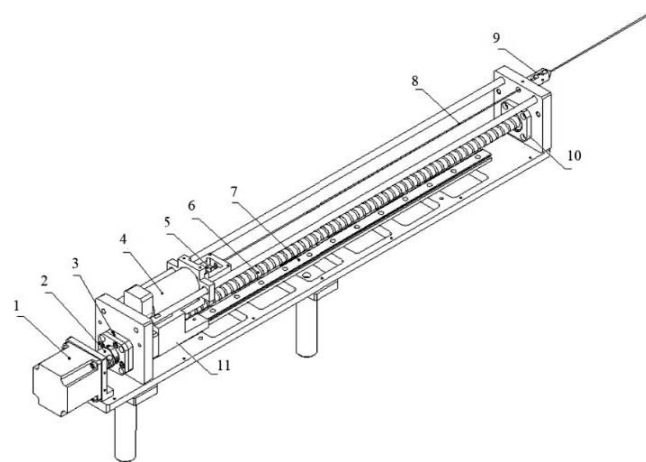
Mechanical structure of the wood resistance drill.—Note: 1. Step motor; 2. Coupling; 3. Back screw support; 4. DC motor; 5. Drill needle clip; 6. Screw rod; 7. Linear guide rail; 8. Drill needle; 9. Shell of the drill needle; 10. Front screw support; 11. Screw slider.
